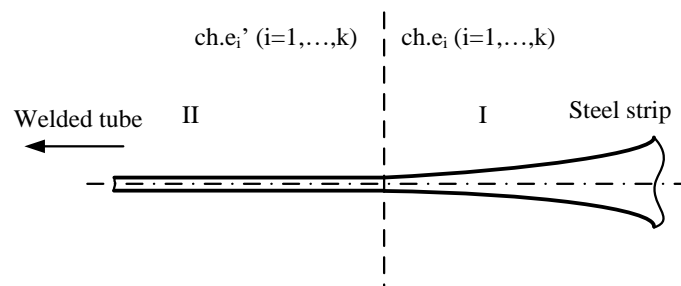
Presentation of zones for steel pipe welding.
